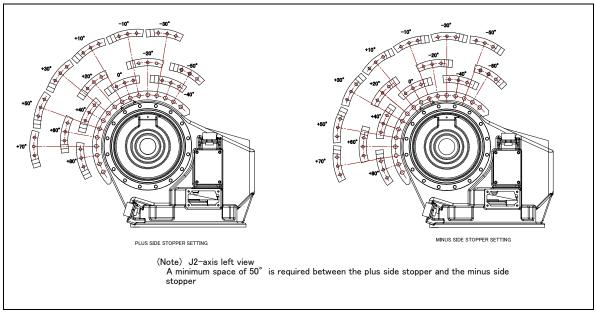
(c) Attachment of J2-Axis movable mechanical stopper
